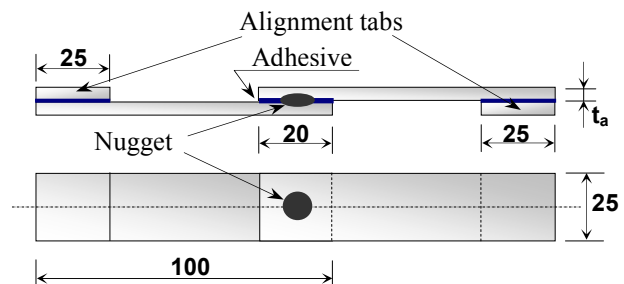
Dimensions of RSW and weldbonded specimens (not to scale, dimensions in mm).
